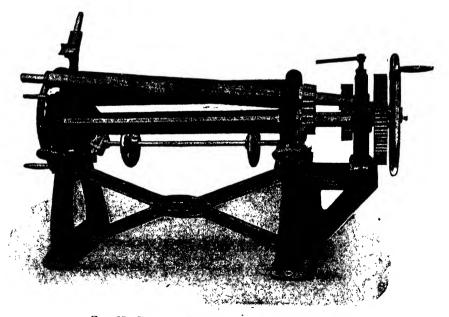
BENDING ROLLS FOR 1-IN. THICK SHEETS
